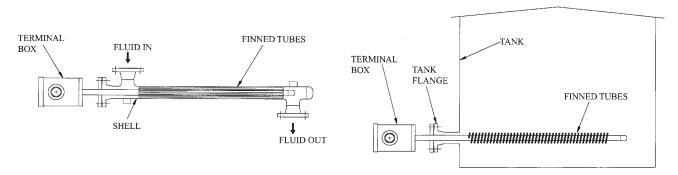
Robust thick fins are continuously welded to the electrical heating element. (Source: Armstrong Engineering Associates.)
